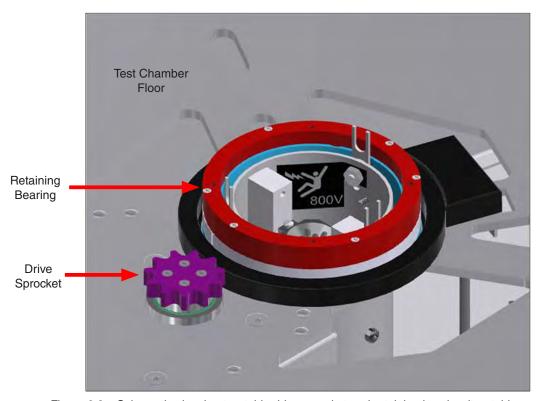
Schematic showing turntable drive sprocket and retaining bearing (turntable removed).
